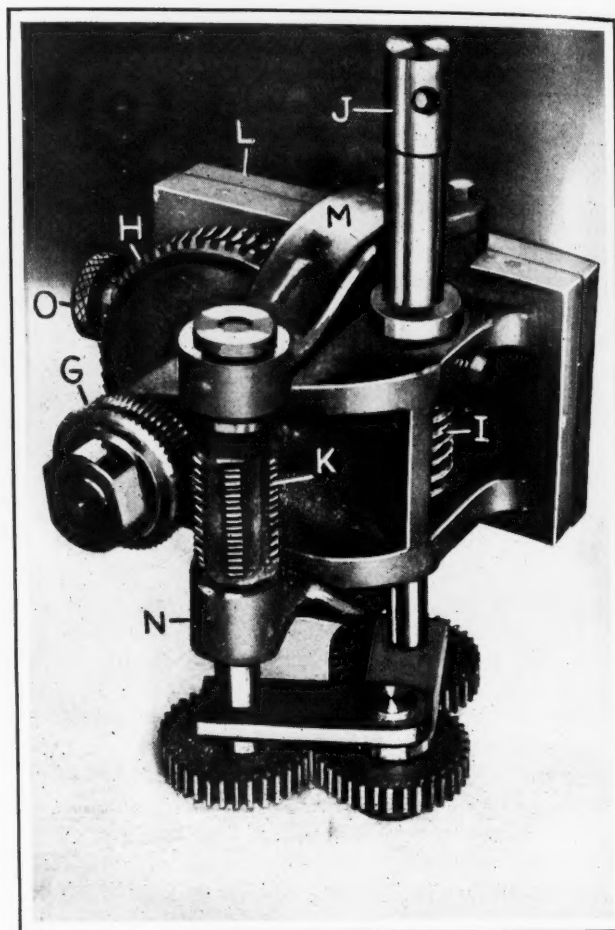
Fixture for Hobbing Worm-gear on Drilling Machine
